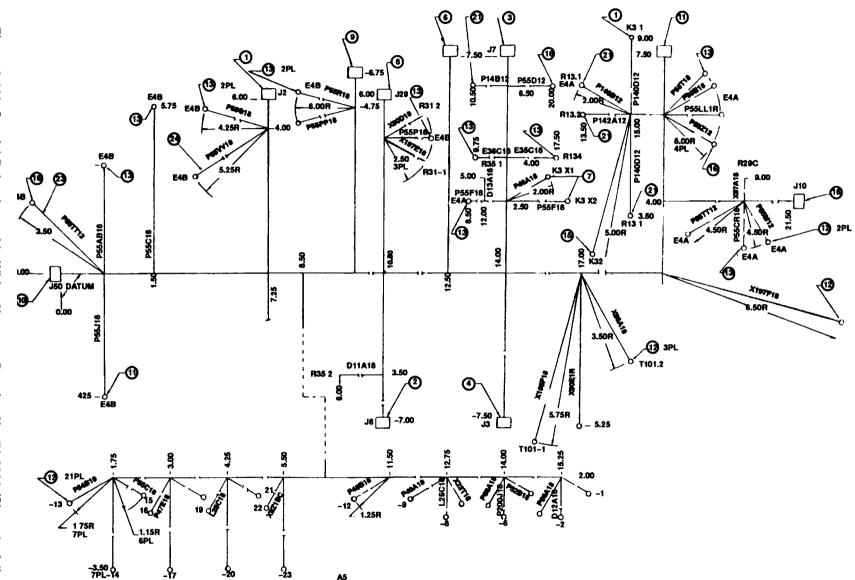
Special Relay Assembly Wiring Harness, Drawing No. 72-2239 (Sheet 3 of 4)
